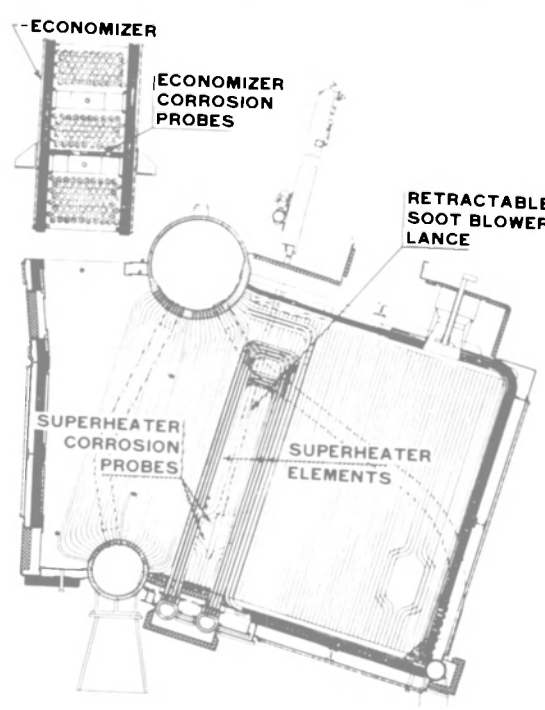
Sketch of V2M8 welded-wall boiler test probe location in relation to soot blower.
